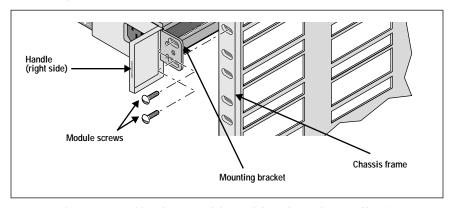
Attaching the Front of the Module to the Rackmount Chassis
